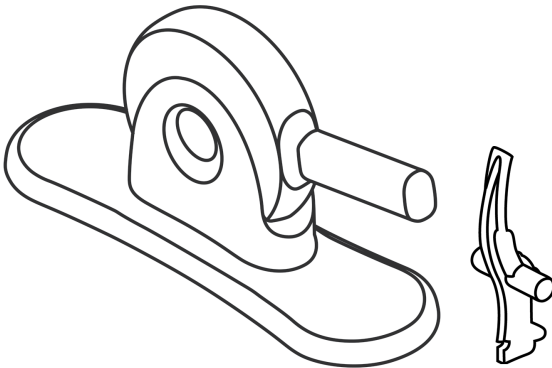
Edwards Crimper and 2-piece Crimp Stopper
